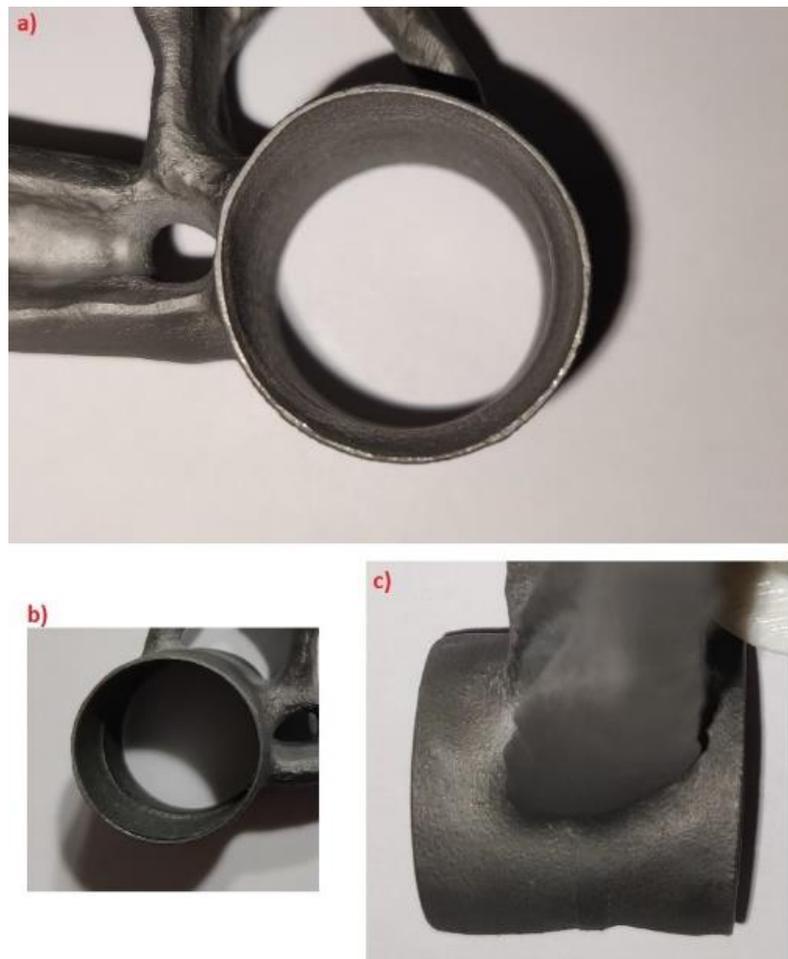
Deformations of manufactured part; a) cylinder deformation to elliptical shape; b) geometrical deviation inside of the cylinder; c) loss of perpendicularity and geometrical deviation outside of the cylinder
